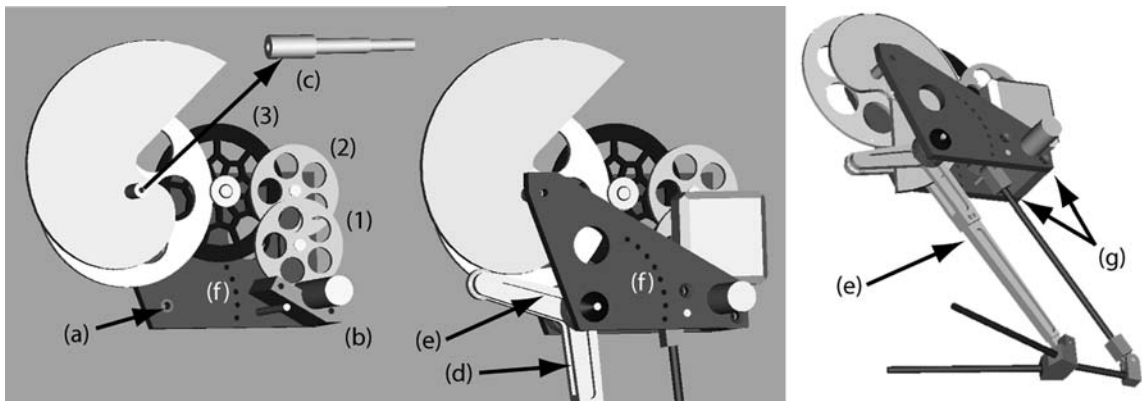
CAD model of the gearbox: (a) brass bearing to reduce friction, (b) distance piece to align the two body plates, (c) cam axis, (d) slot in main leg for the cam, (e) main leg, (f) series of holes for spring setting, and (g) the two body plates. (1), (2) 0.2 mm polyoxymethylene (POM) gears and (3) 0.3 mm POM gear
